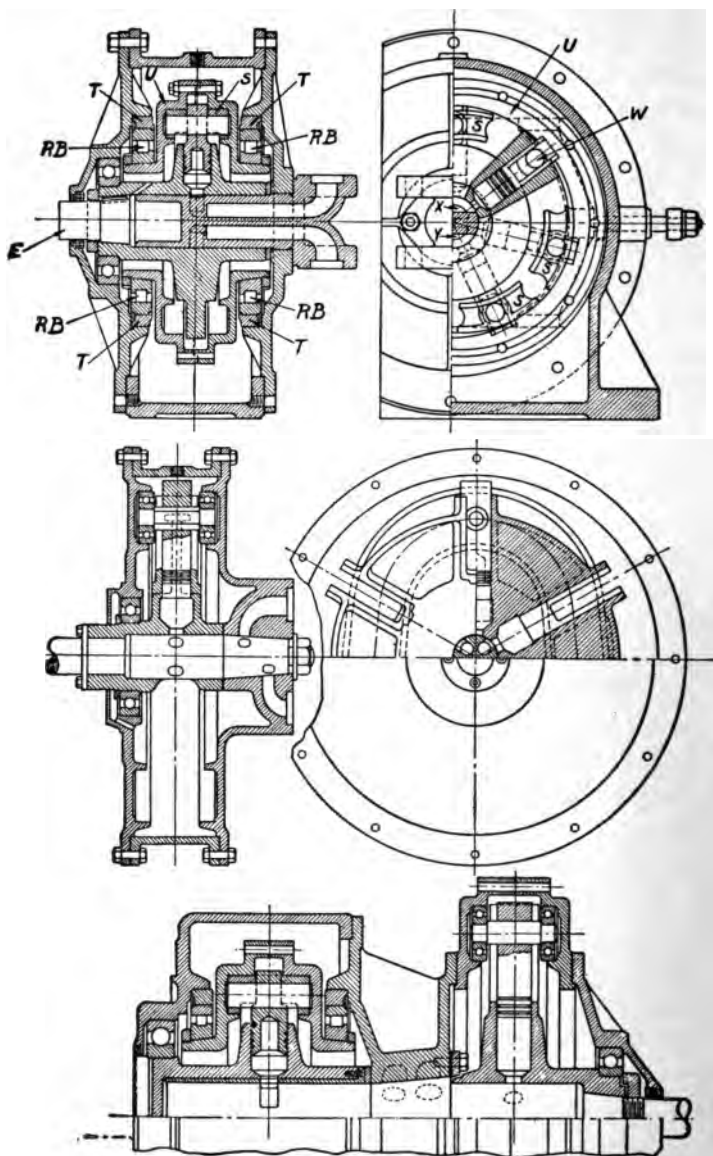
Details of Helo-Shaw Hydraulic Pump and Motor
